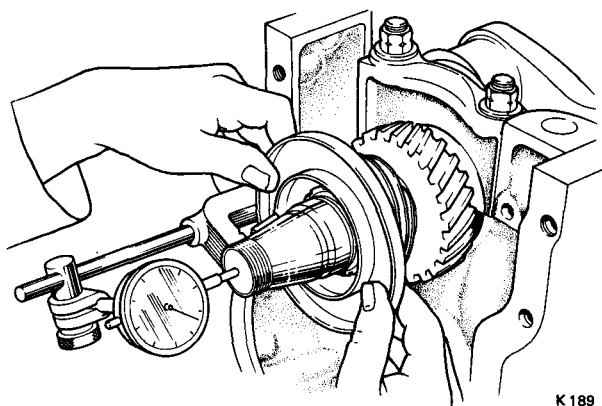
CHECKING THE CRANKSHAFT END-FLOAT
